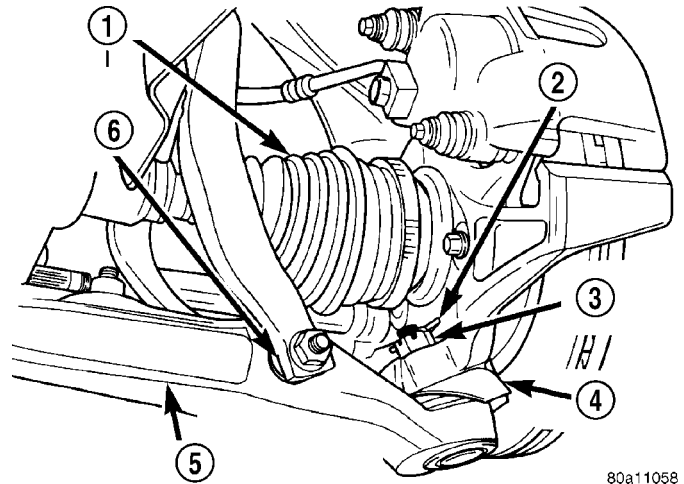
Lower Ball Joint Attachment To Steering Knuckle
